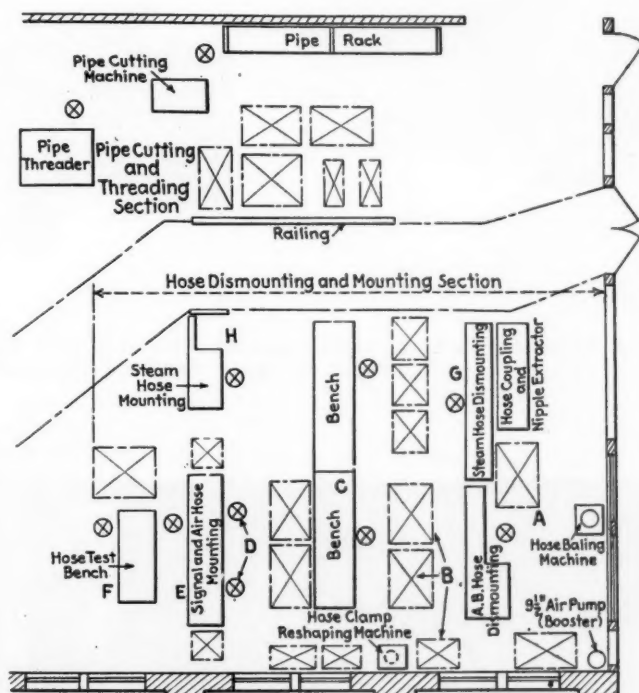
Arrangement of benches and location of workmen in hose-repair section of Pitcairn shop
